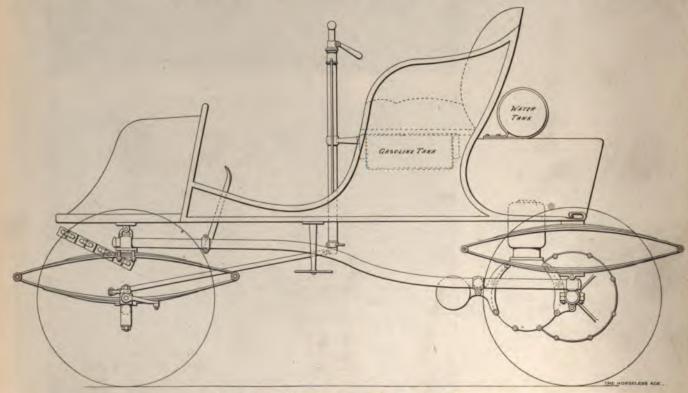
Pierce 6 Horse Power Stanhope Motorette.
